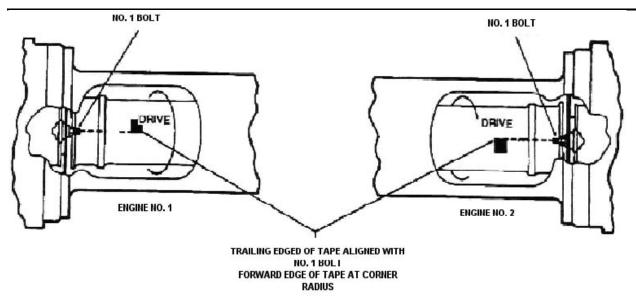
Engine Output Shaft Connecting Bolt and Reflective Tape Location
